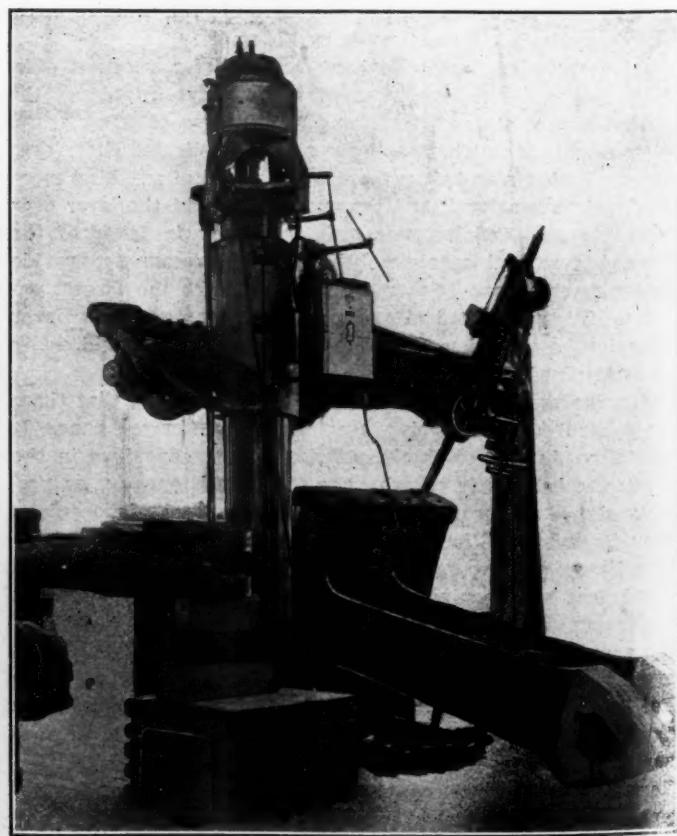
SPECIAL NILES PORTABLE FLOOR PLATE DRILL, WITH DIRECT VERTICAL-MOTOR DRIVE; AT THE WORKS OF THE BULLOCK ELECTRIC MFG. COMPANY.
